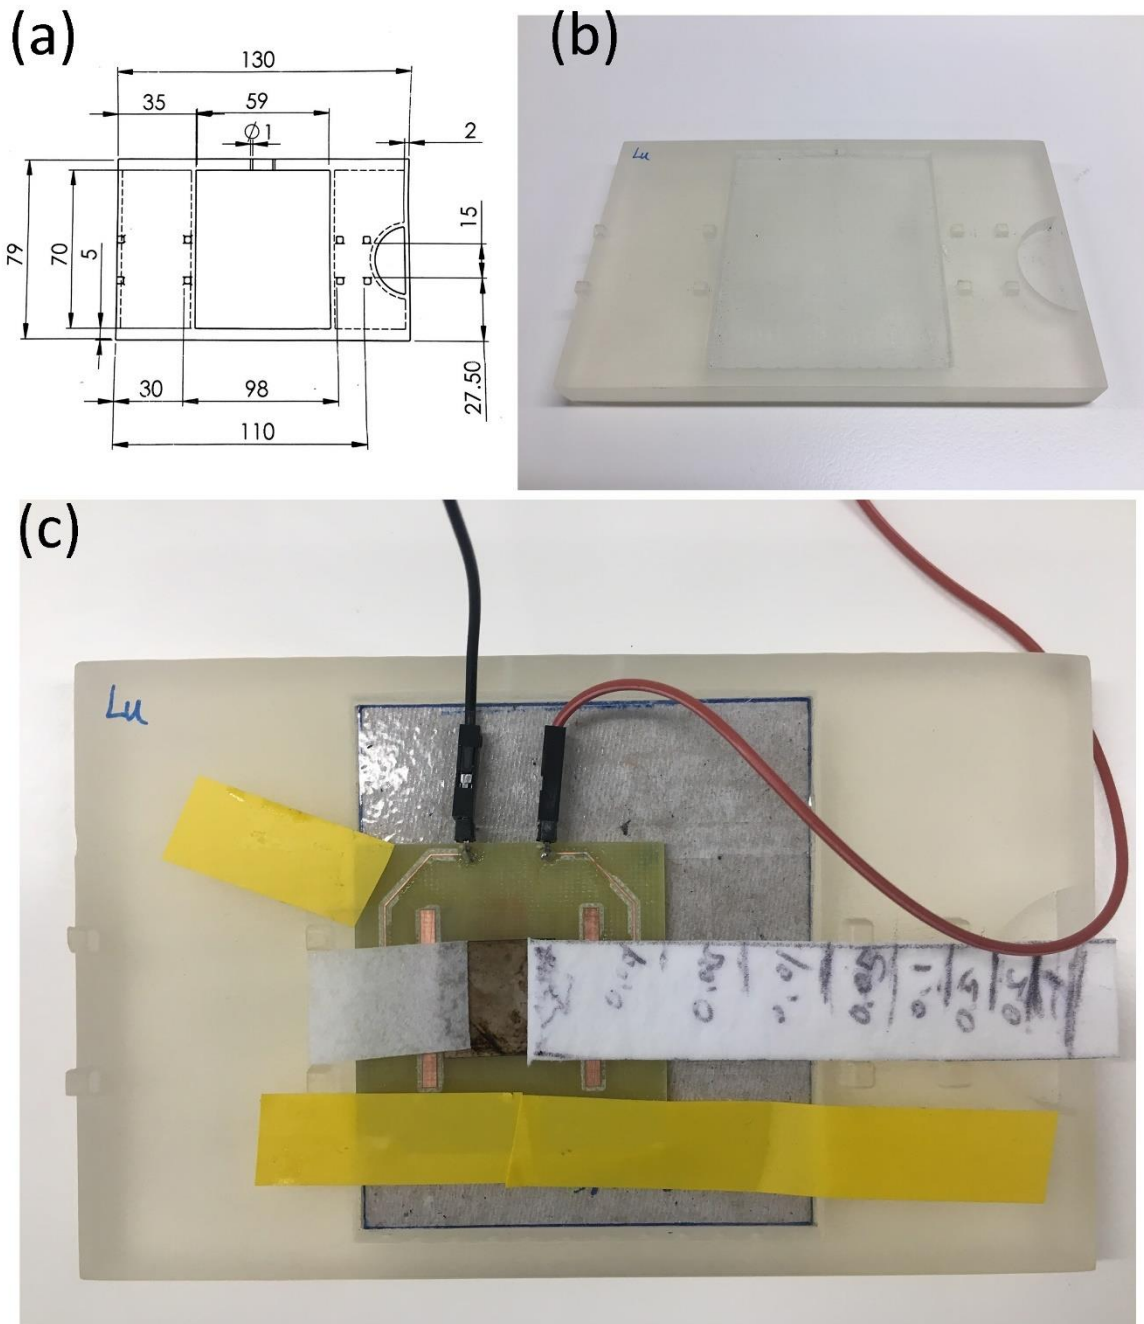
3D printing design and assembly: (a) Drawing of 3D printed model design of sensor holder; (b) Photo of 3D printed structure; (The distance of the dots was designed to be the same width as sample pad and absorbent pad and was used to fix the pads of the strip. The electrode board was embedded above the sunken square to create the flow assembly almost at same horizontal level.) (c) Photo of complete flow system: materials (sample pad, nitrocellulose membrane and absorbent pad) alignment with angle formed by two overlapped cover slips on interdigitated electrode with flow rate calculation marks.
